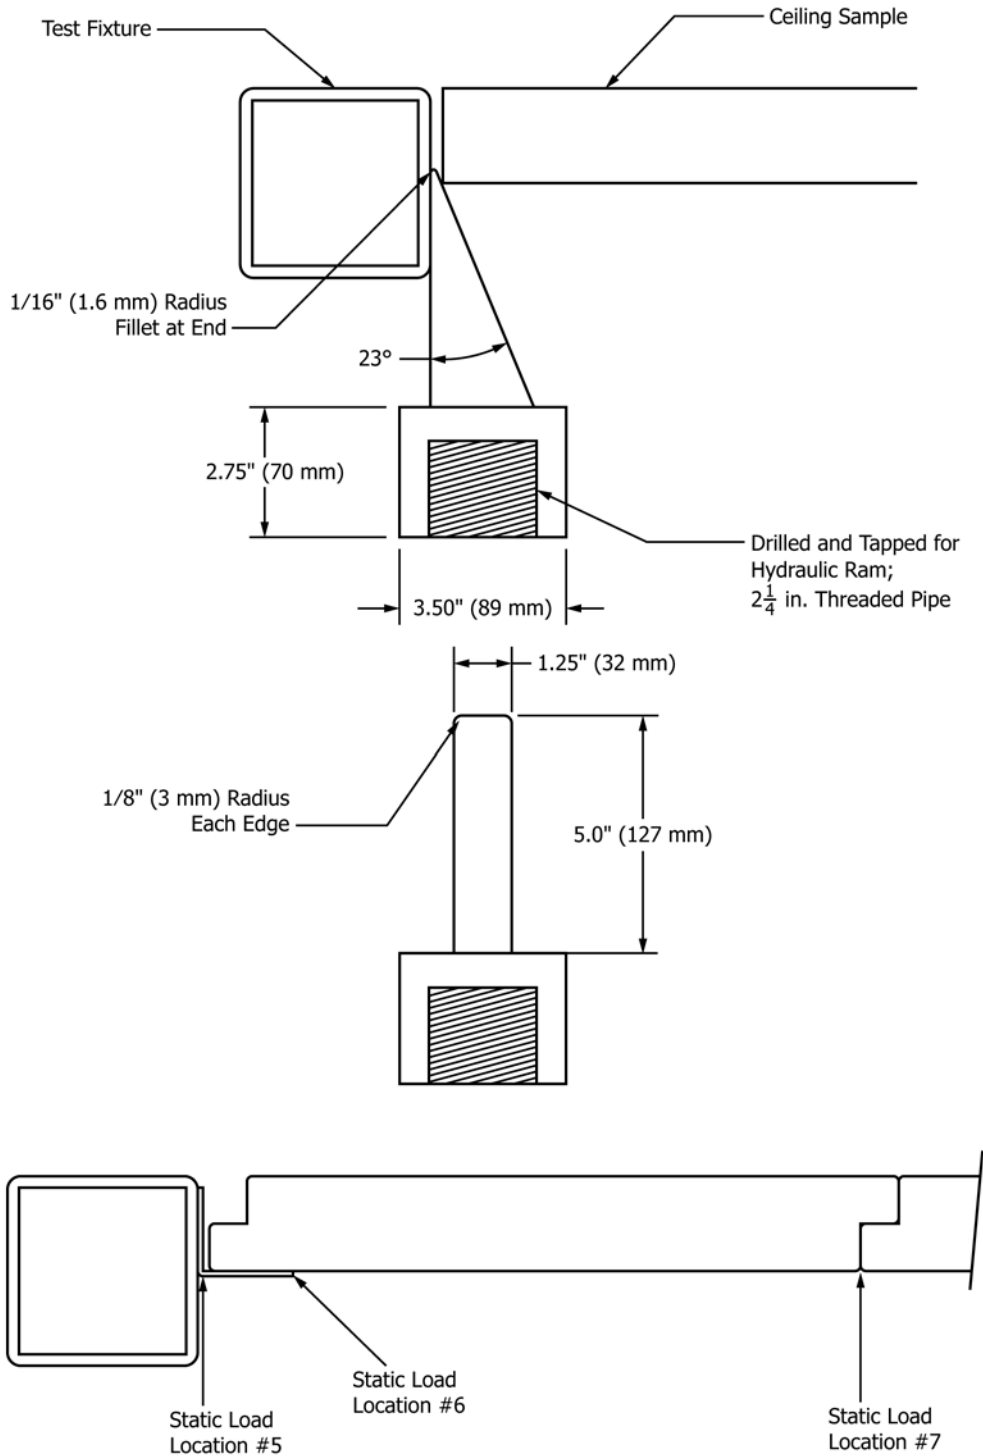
Hydraulic Pry Test Adapter Static Load Table 1 Locations 5 – 7
